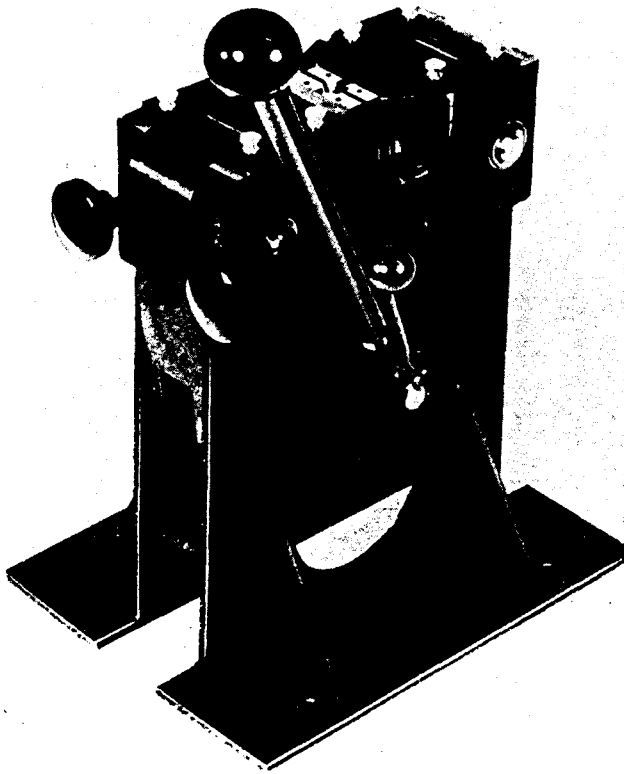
A Manually Operated Cold Welding Machine
